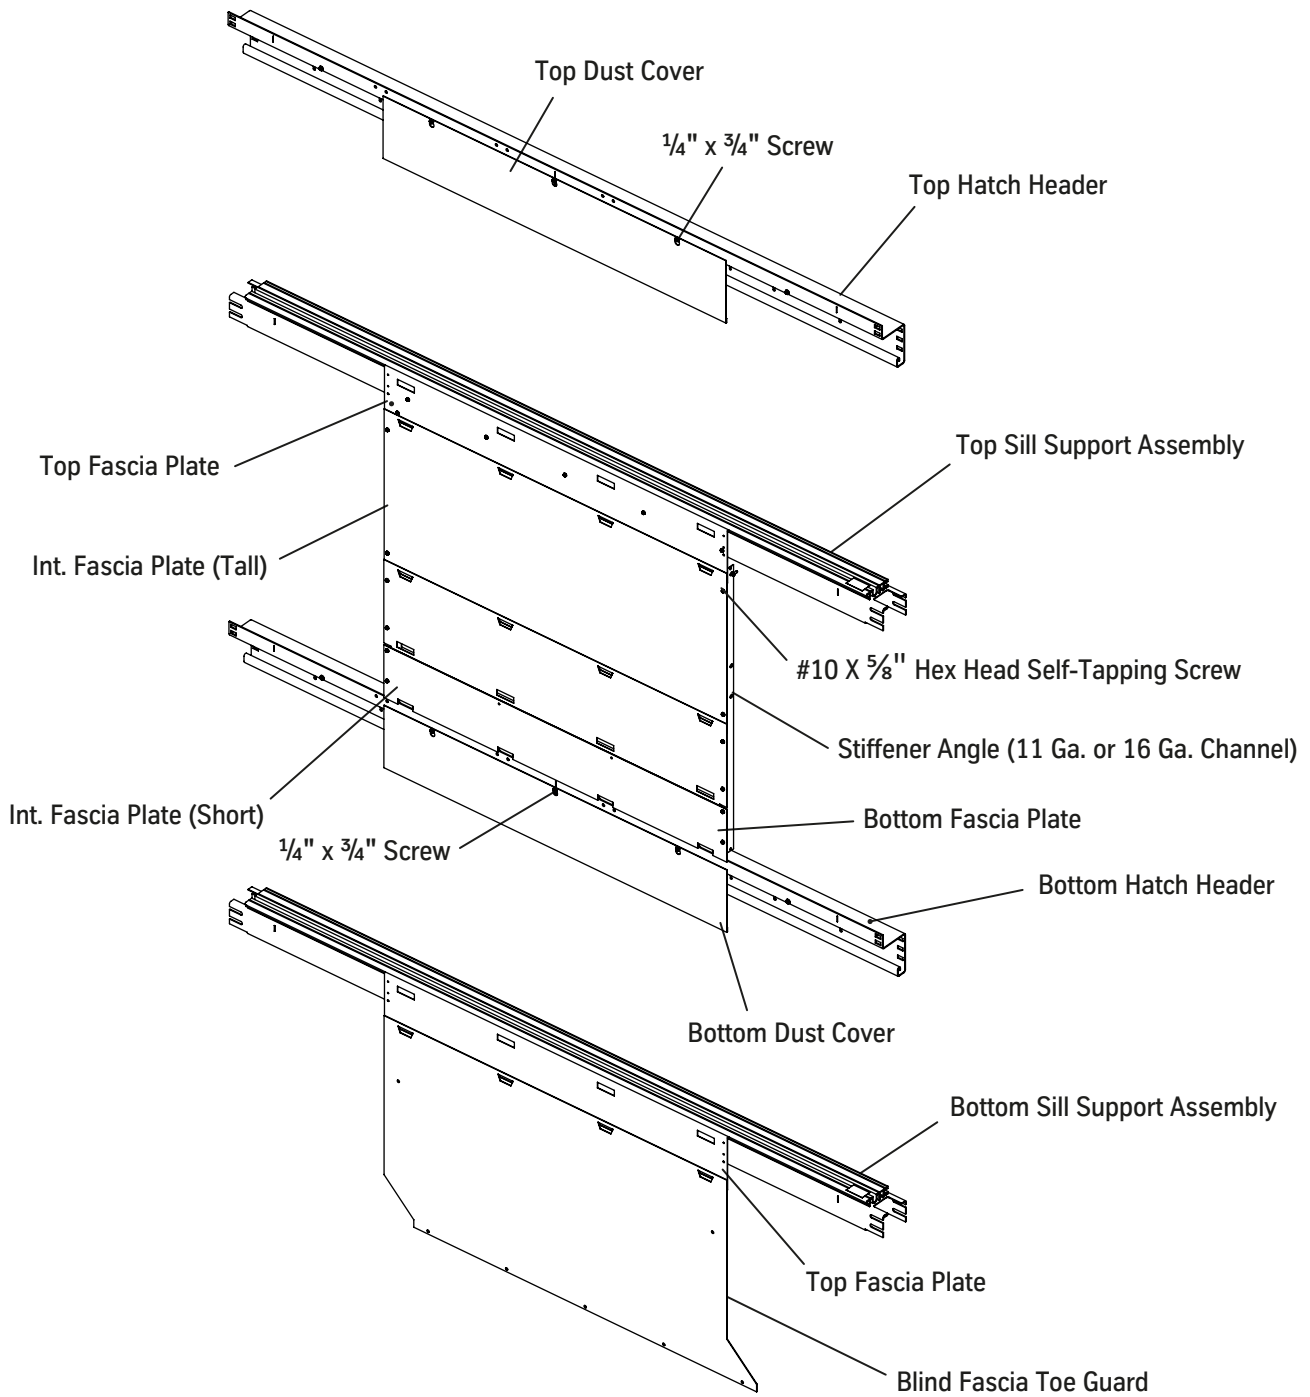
Install Fascia Plates, Dust Covers, and Toe Guards (1 of 4)
